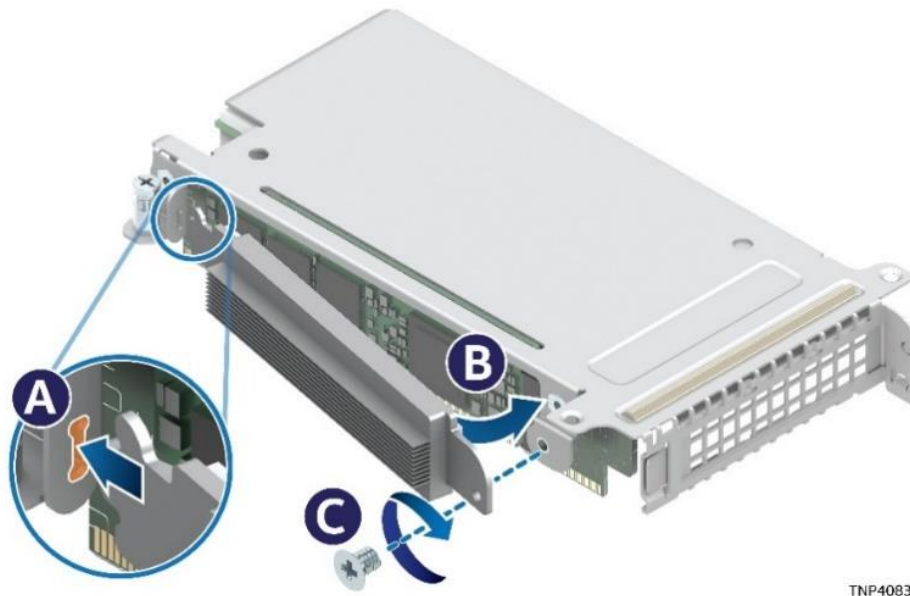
Installing Liquid-Cooled M.2 Cold Plate
